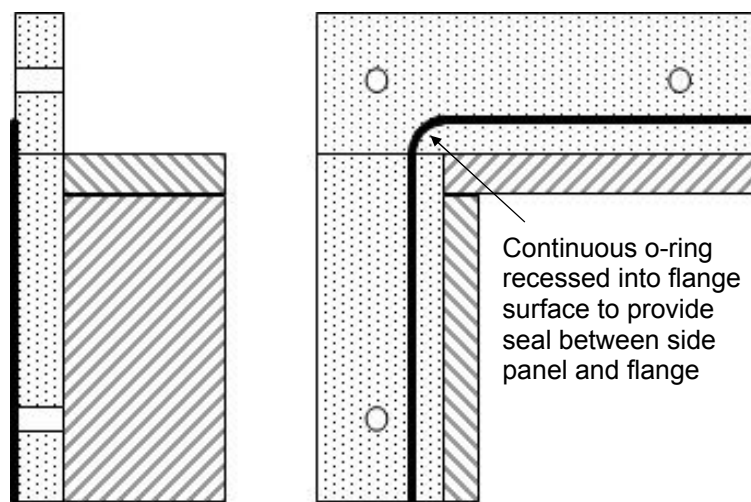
External mounting flange (a) elevation (b) end-view
